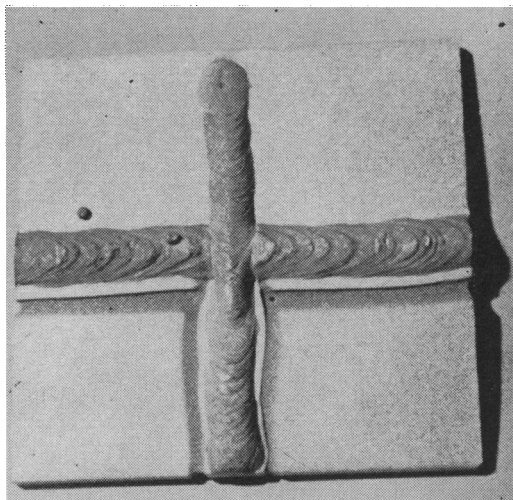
Intergranular corrosion of stainless steel. The corrosion free plate in the upper part of the photo is of low carbon, Type 304 stainless steel, whereas the lower plate, showing heavy concentration of intergranular, weld corrosion is of Type 302 stainless steel.
